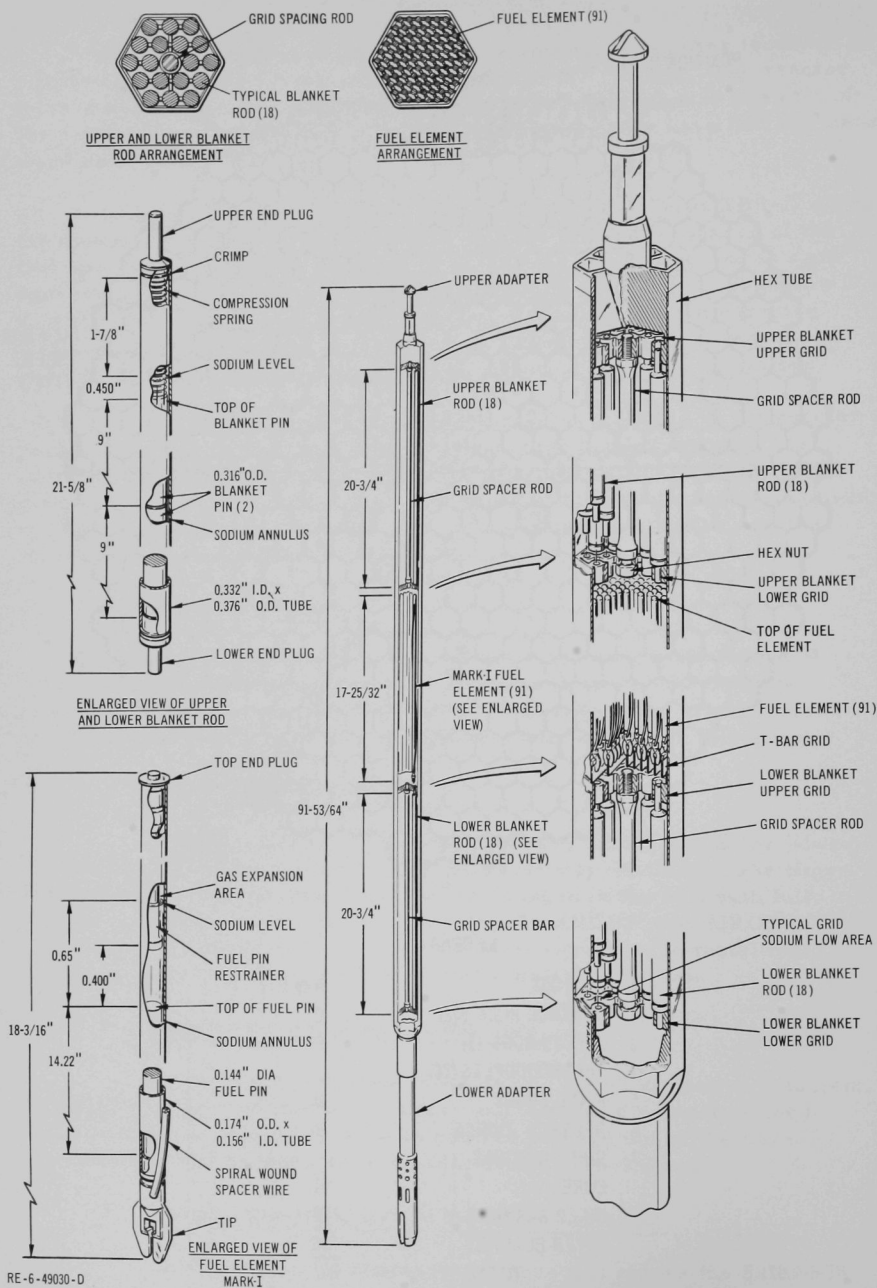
EBR-II Mark-I Driver-fuel Subassembly (with Uranium Blankets)
